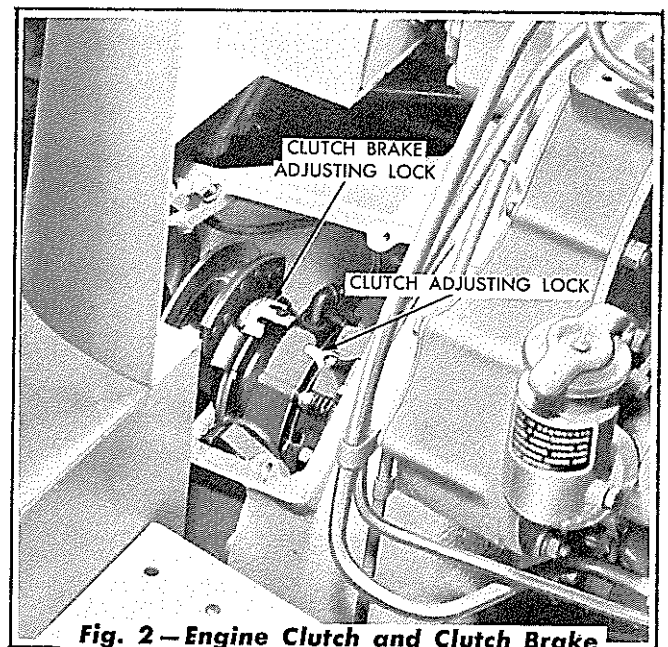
Engine Clutch and Clutch Brake Adjusting Locks
